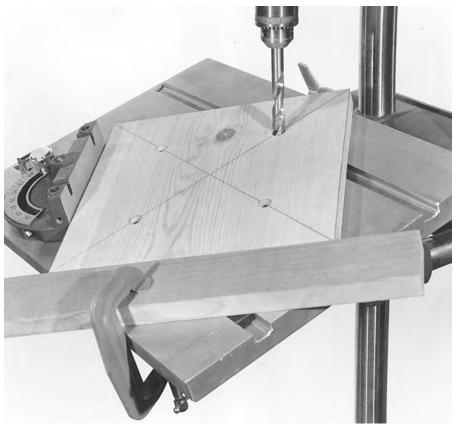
To a limited extent, the V-block setup can be used to drill angular holes in square workpieces.
